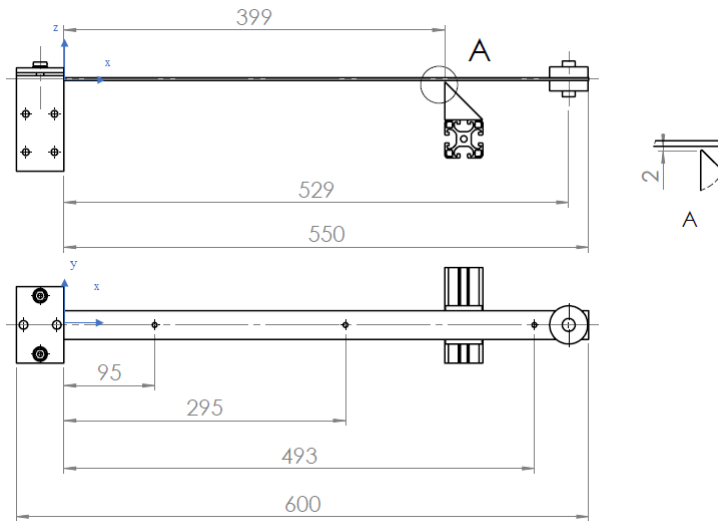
Sketch of the nonlinear system in configuration 3 of 1st campaign, relevant dimensions are in millimeters.
